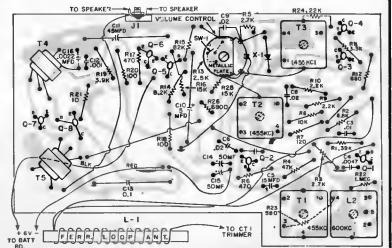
ETCHED PRINTED CIRCUIT CHASSIS 120472 (TOP VIEW)
